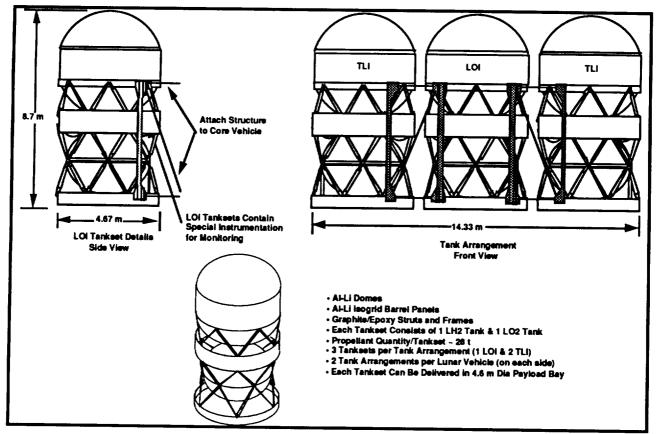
Typical Tank Arrangement Details
